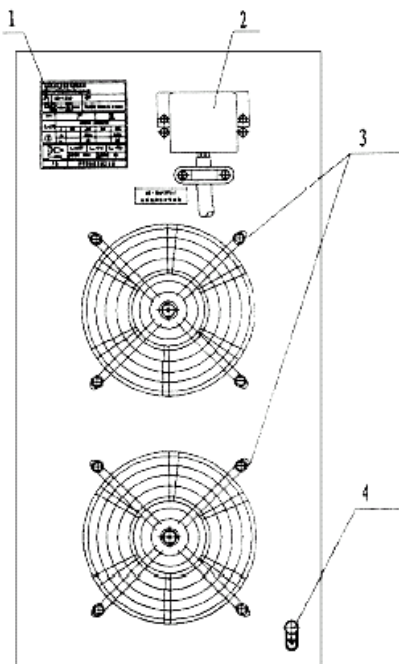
Front panel of inverter-type DC submerged arc welding machine of MZ series
